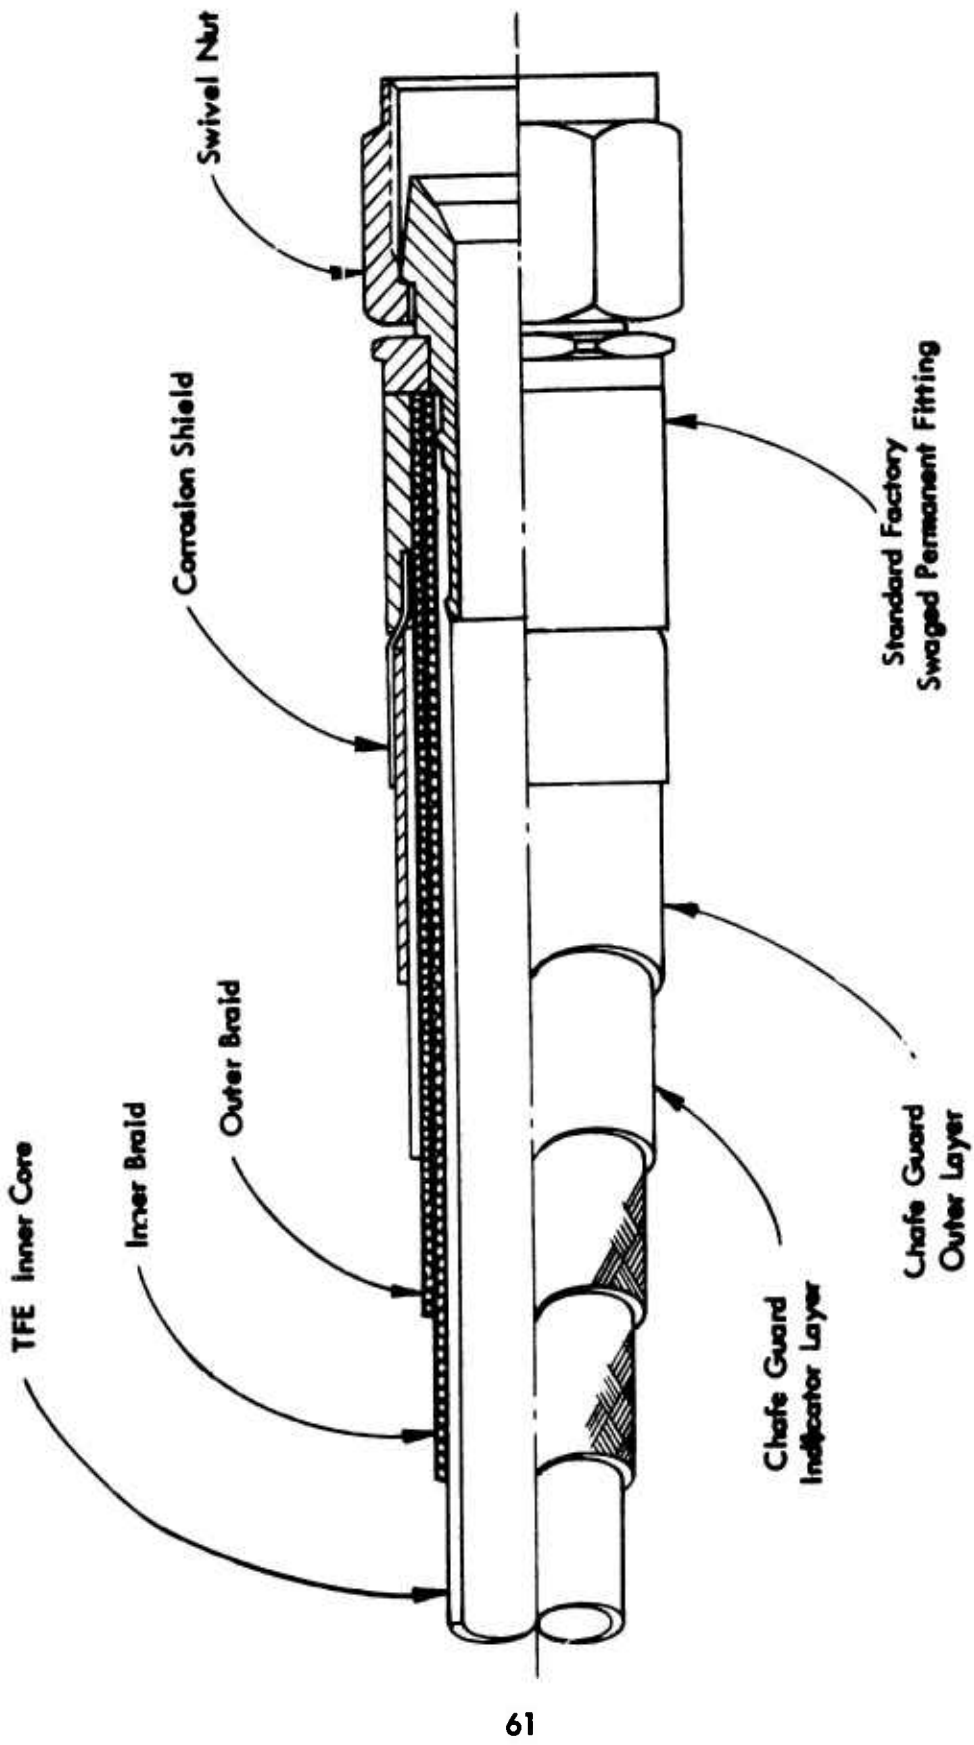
Hose-to-Fitting Assembly With Corrosion Shield.
